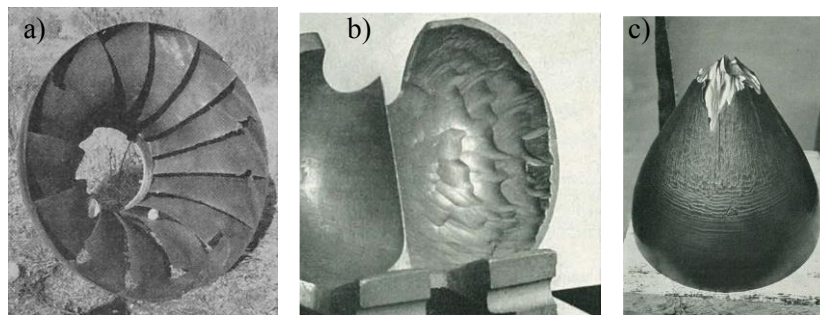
Examples of eroded turbine parts: a) Francis runner (with jammed stones) [6], b) Pelton bucket (left half of bucket reconstructed by welding) [7] and c) needle tip of a Pelton injector [7].
